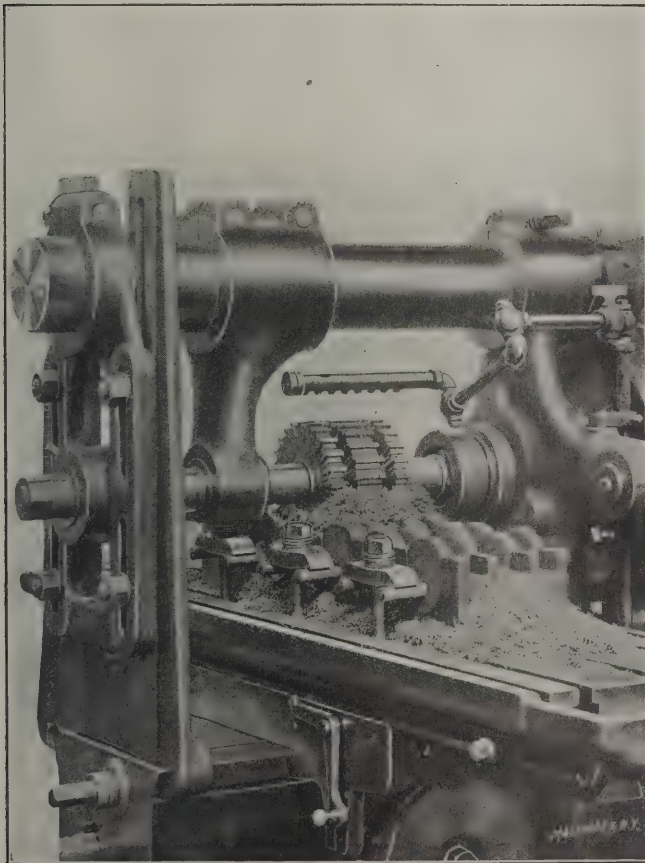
Milling Toggle Levers for Turret Lathe Chucks.
